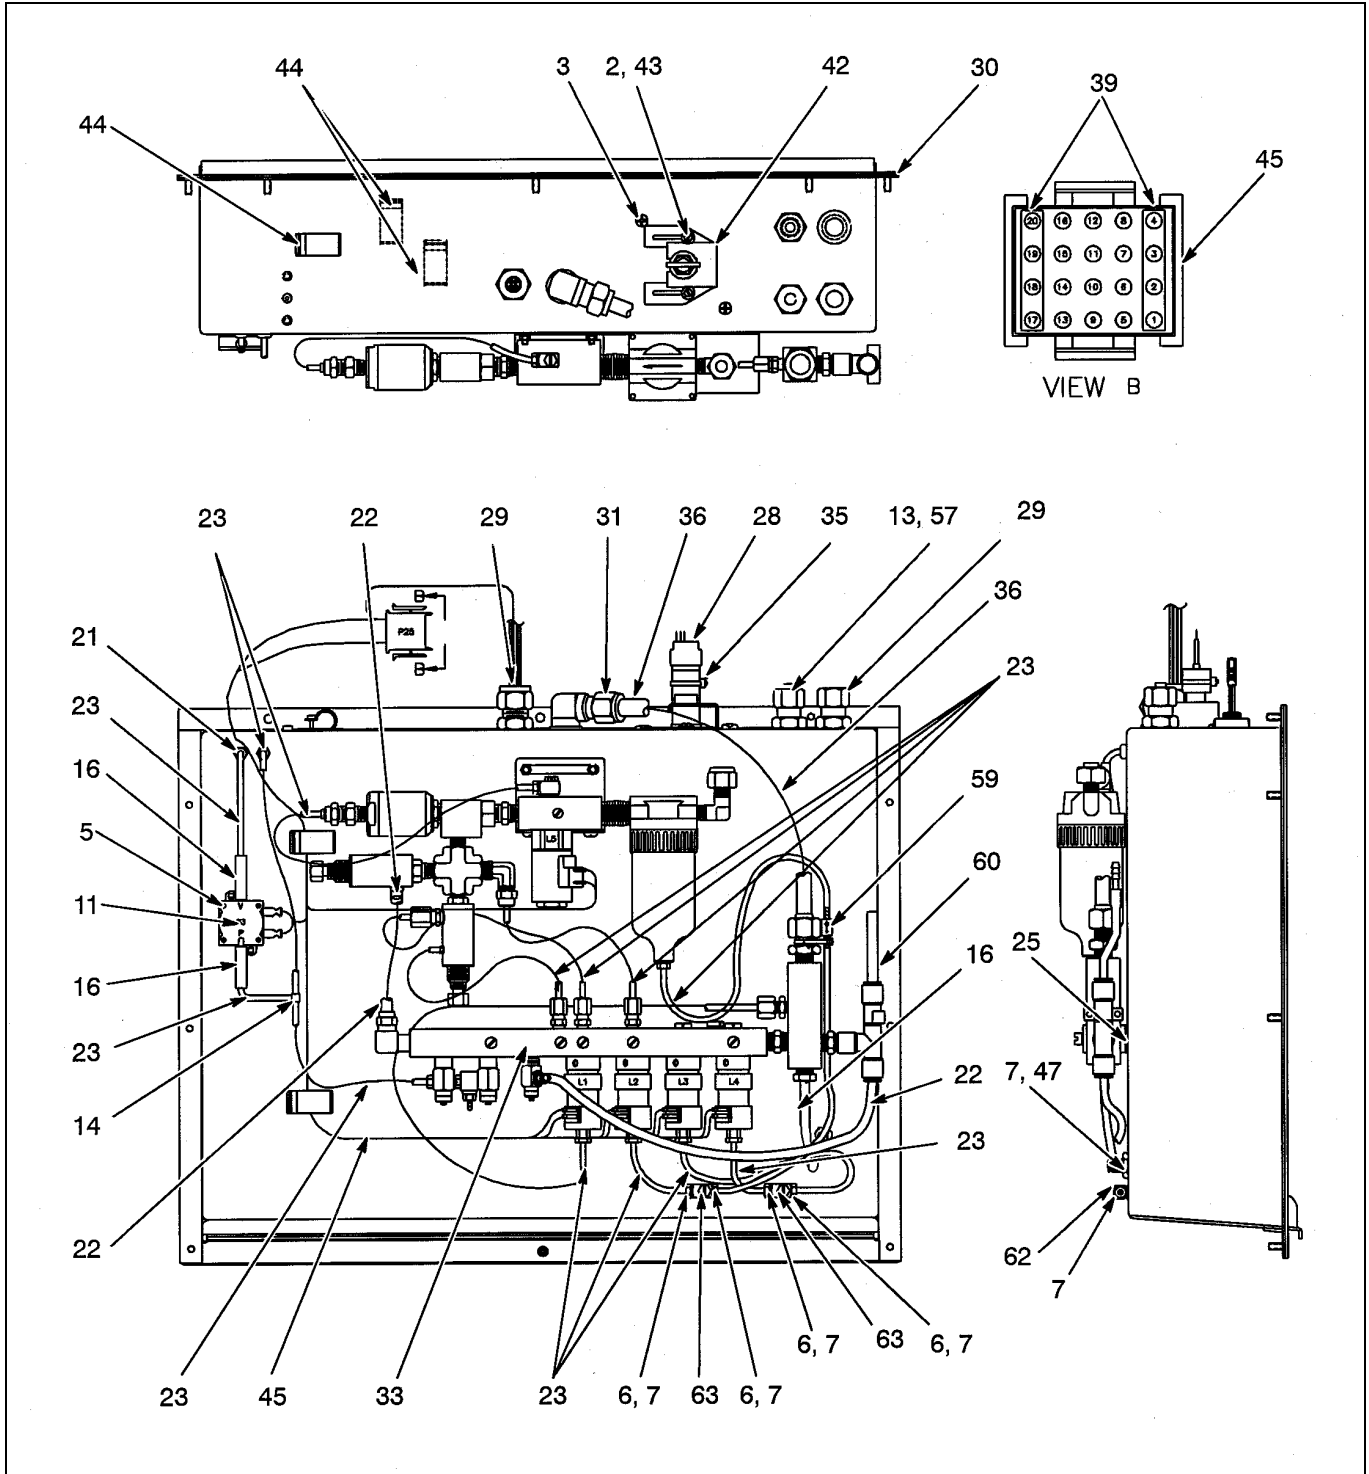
EXCEL[®] Hydraulic/Pneumatic Assembly, Sheet 2
